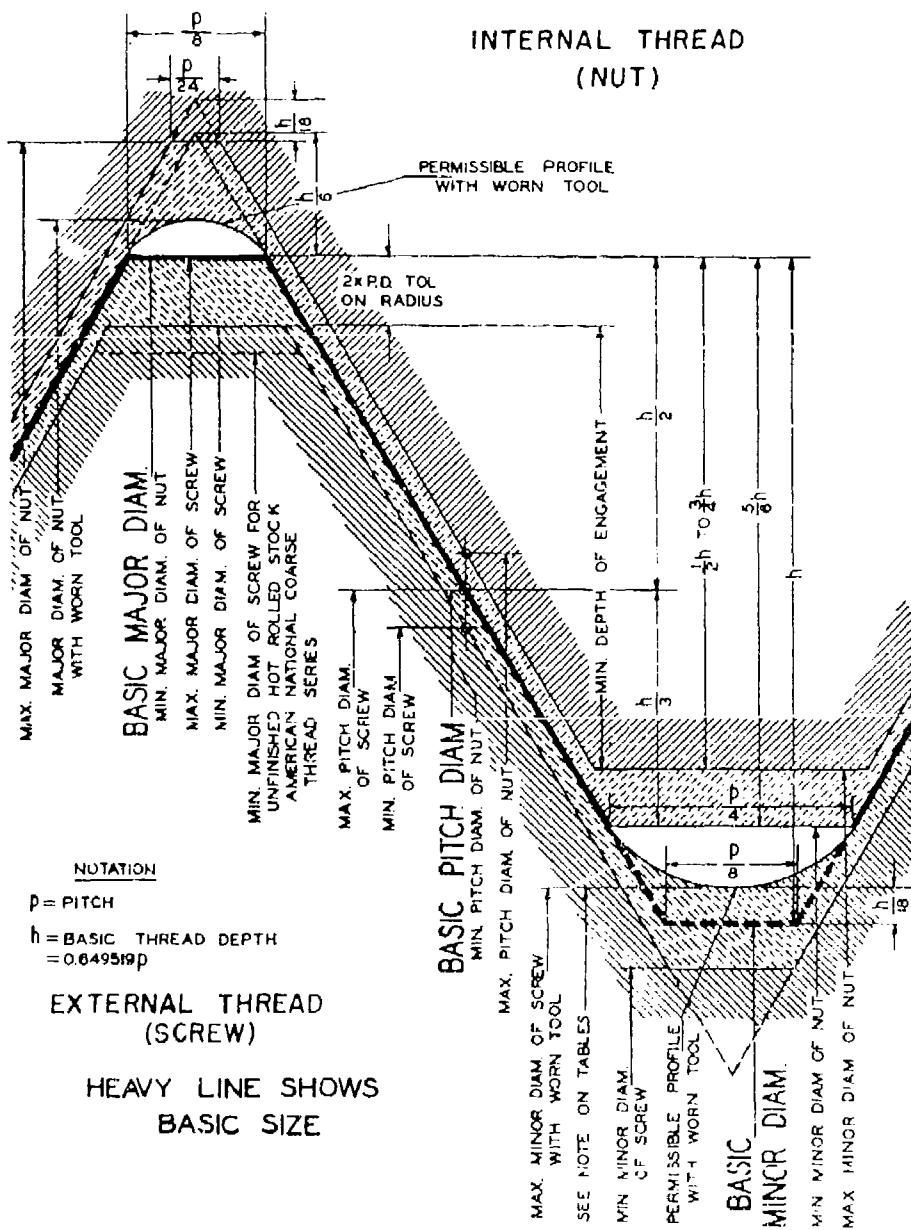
Disposition of tolerances and crest clearances for class 2.
